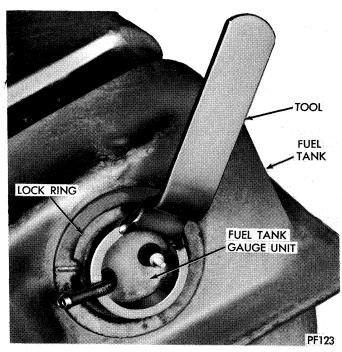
Removing or Installing Fuel Tank Gauge Sending Unit
